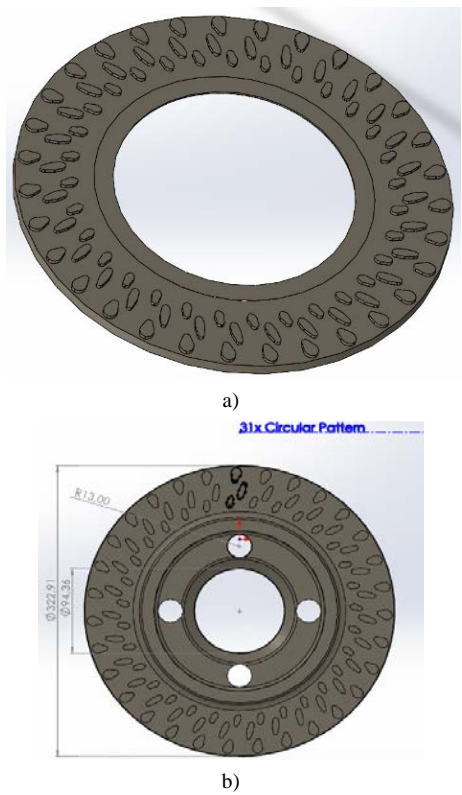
Droplet Channel; a) General view, b) Dimensional view
